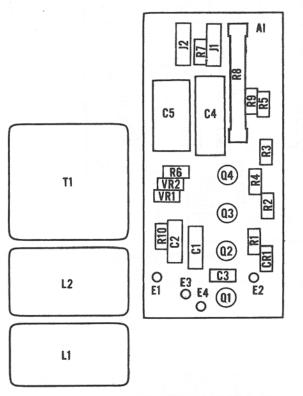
Dc-to-dc converter and regulator module 1A11, parts location.
